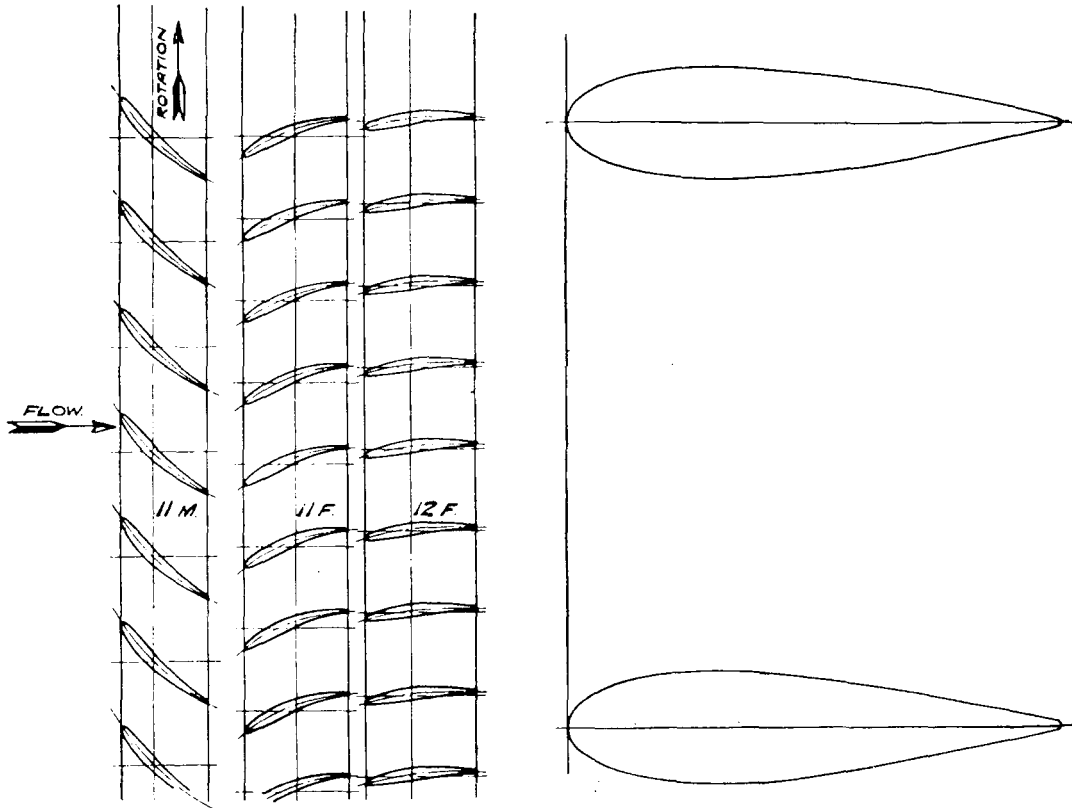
DETAILS OF 'G2' COMPRESSOR BLADING AND STRUTS AT OUTLET END—
